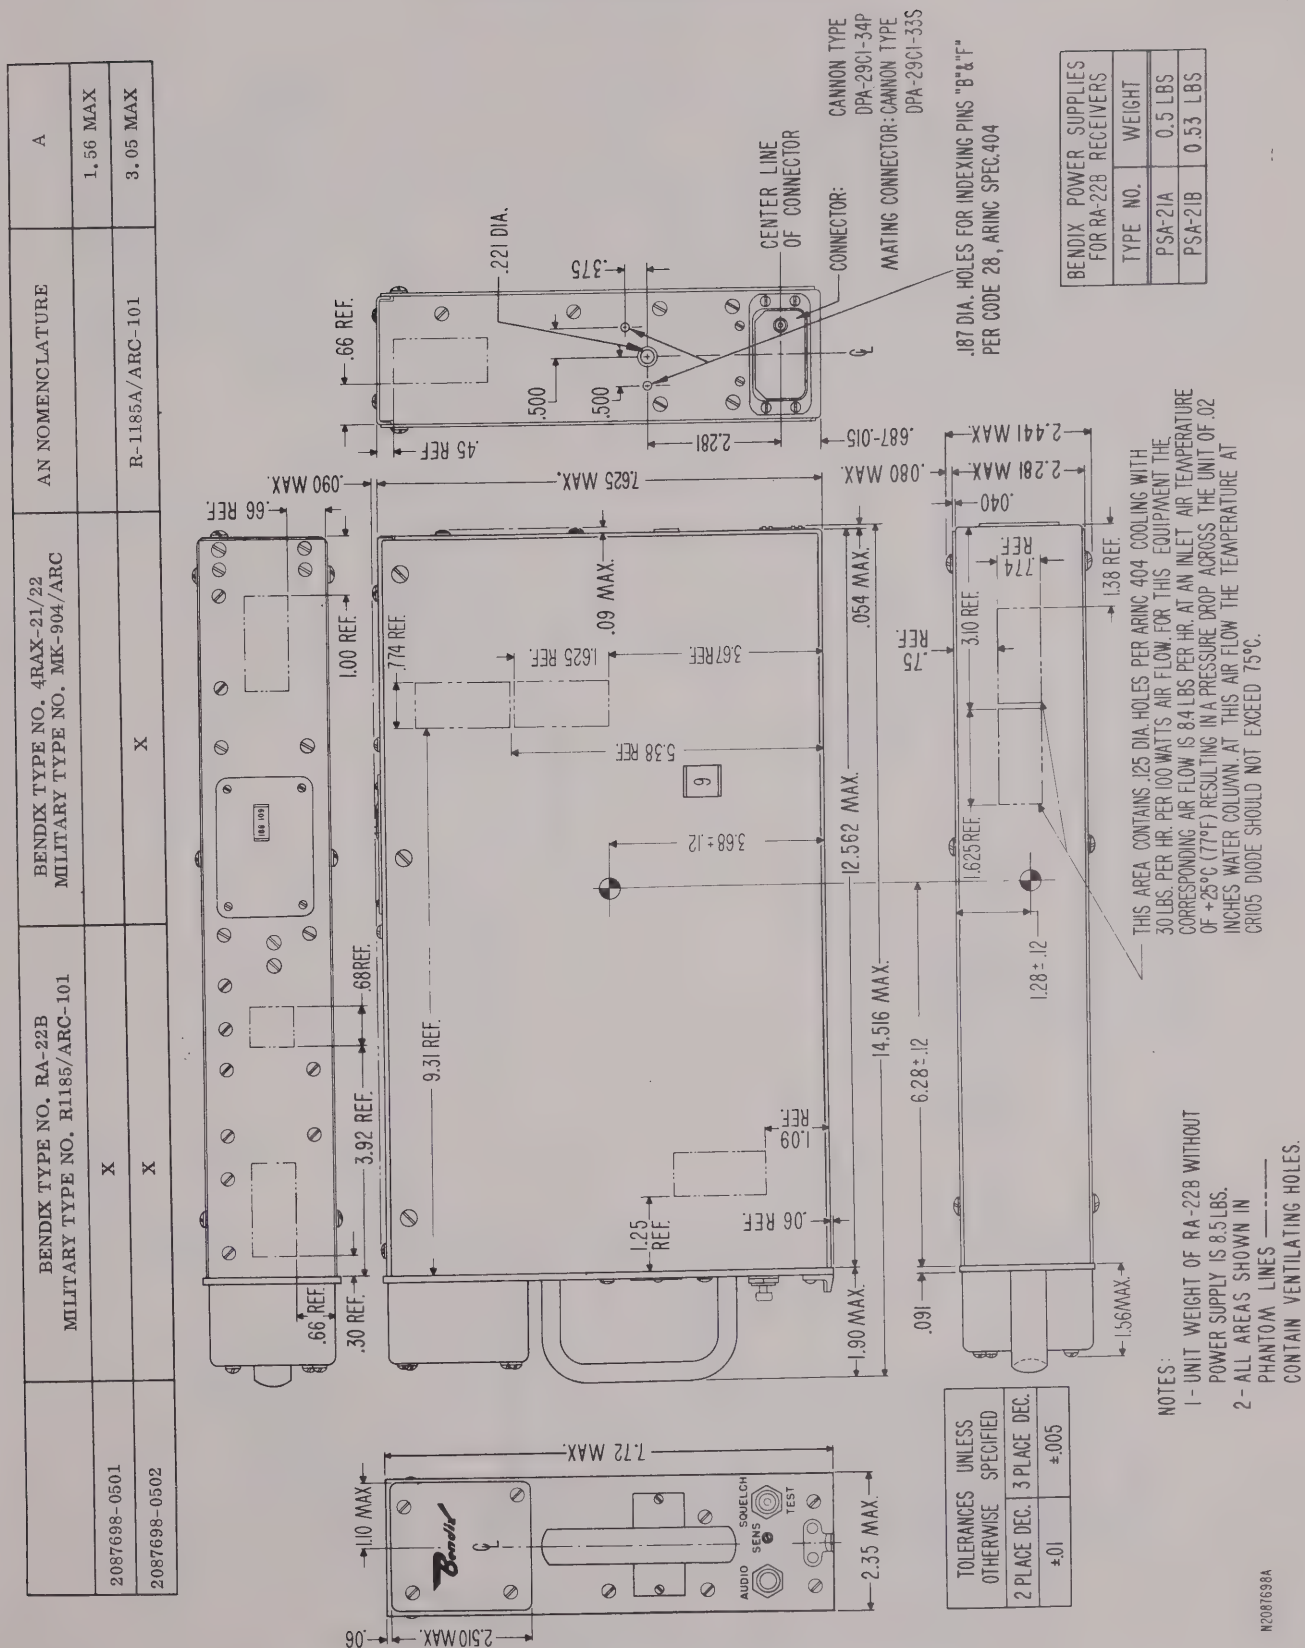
RA-22() VHF Receiver, Outline Drawing
